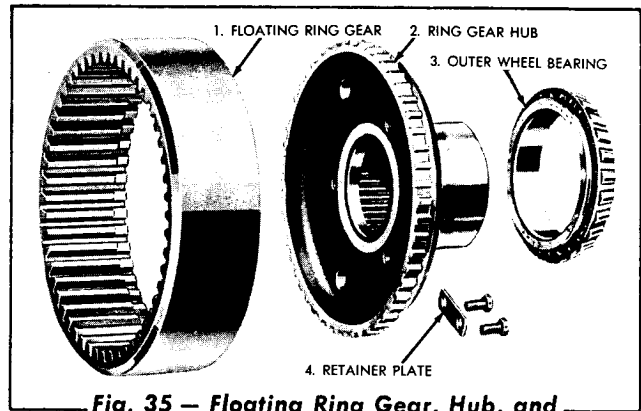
Floating Ring Gear, Hub, and Bearing — Exploded View
